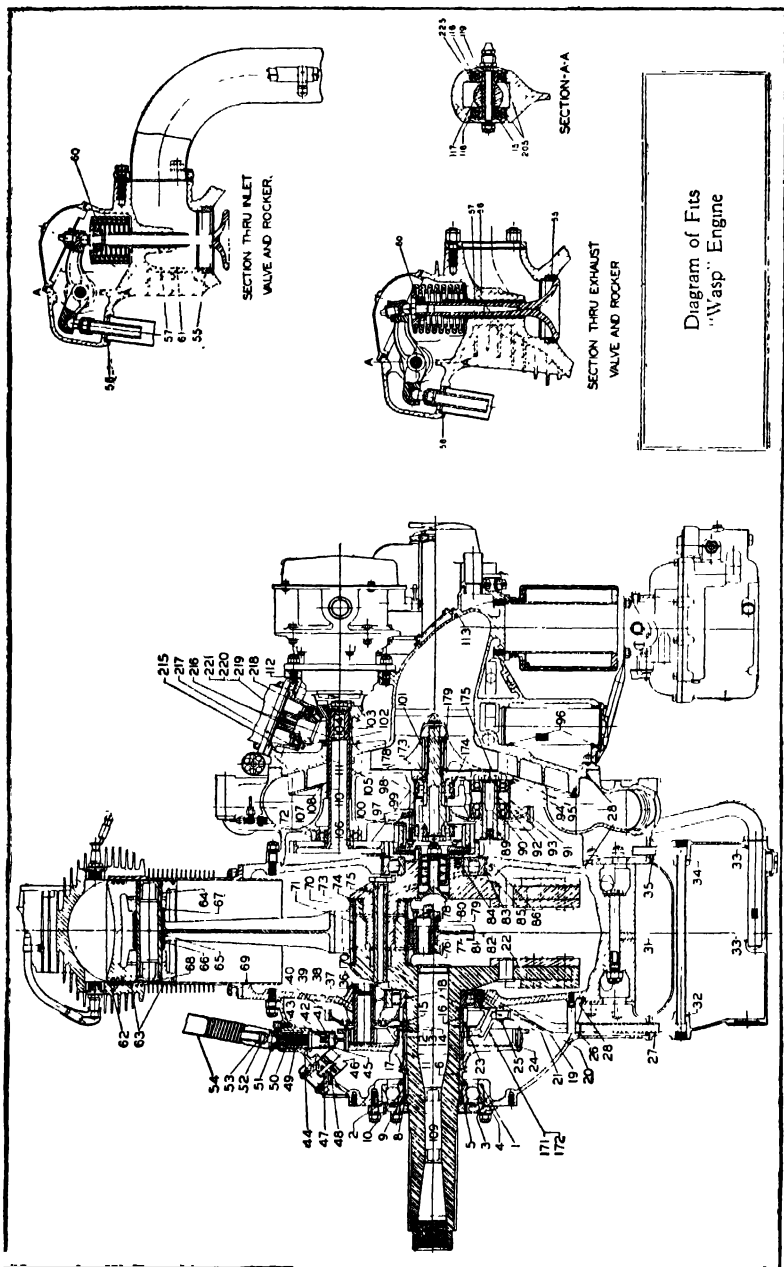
Sectional Diagrams Showing Numbered Parts to Serve as Key Numbers for Tabulation of Fits and Clearances; also Construction of "Wasp" Engine.
